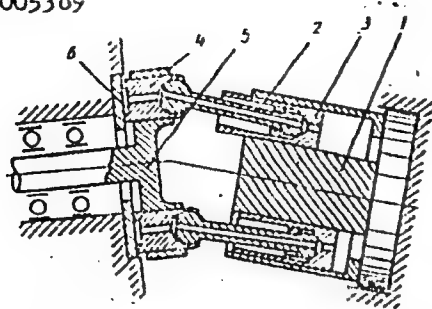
1 - cylinder block; 2 - connecting rods; 3 - pistons; 4 - socket; 5 - drive shaft; 6 - recess in the socket
